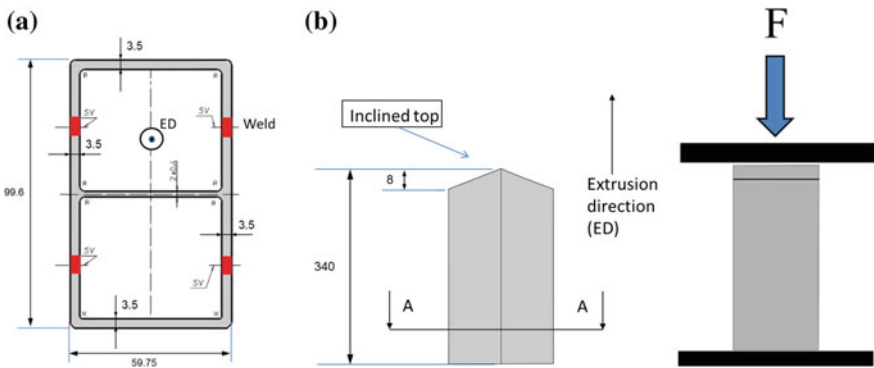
a Geometry of as received profile (cross section A-A) and b axial crushing test setup
